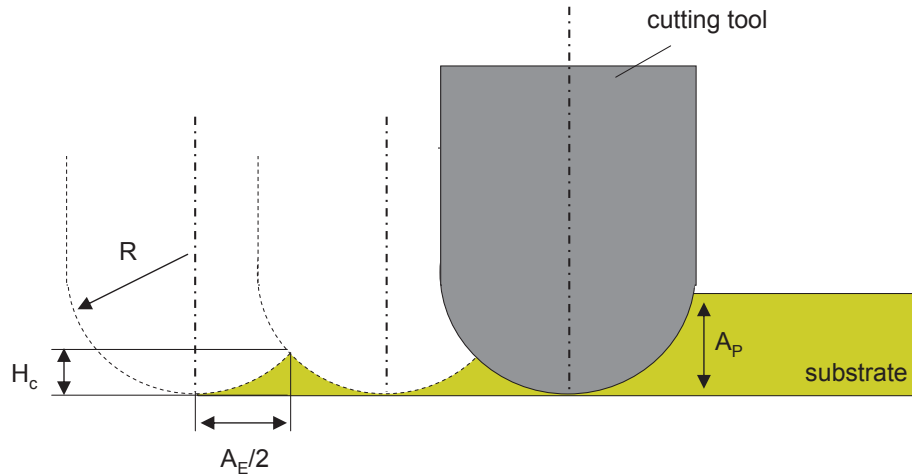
Schematic illustration of uncut struts between three machined groove-like patterns. Radius of the cutting tool R , axial depth-of-cut A_p , cusp height H_c and the step-over value between two cutting passes A_E . Modified sketch according to Dormer-Tools, 2005.
